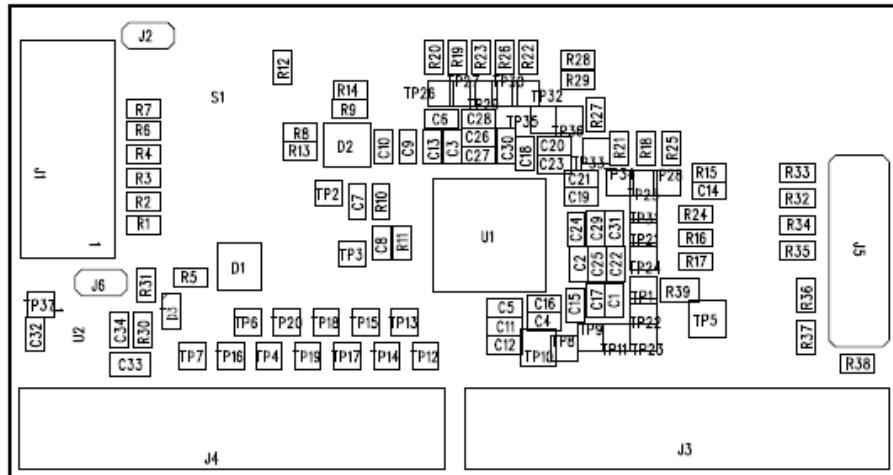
UCD3138CC64EVM-030 Top Layer Assembly Drawing (top view)
